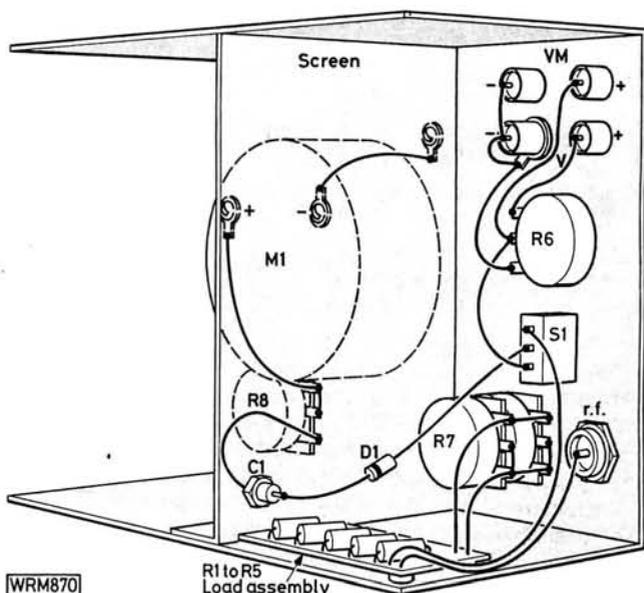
A cutaway internal view of the prototype. Note the voltage input earthing tag is taken from the phono socket and carefully enlarged to fit the thread of the wander plug socket. The feed-through capacitor is soldered to a washer or piece of tinplate which is then bolted to the dividing screen
